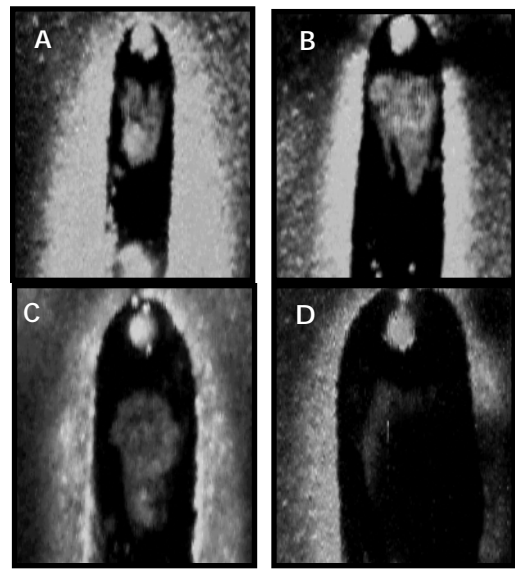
Back-side view of keyhole and weld pool at different currents and welding speeds. Plasma gas flow: 1.3 L/min (2.8 ft<sup>3</sup>/h), orifice diameter: 1.57 mm (0.062 in.). A — Welding speed 2 mm/s, welding current 60 A; B — welding speed 2 mm/s, welding current 65 A; C — welding speed 1.8 mm/s, welding current 70 A; D — welding speed 1.6 mm/s, welding current 75 A.
